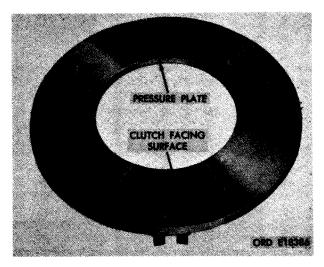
INSPECTING PRESSURE PLATE CLUTCH FACING SURFACE.
